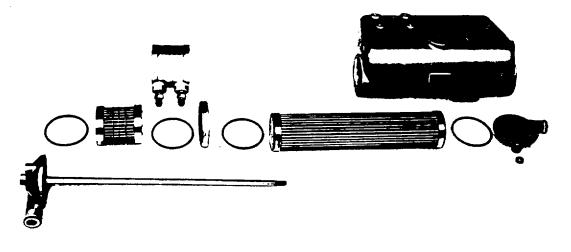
Exploded view of Heat Exchanger Assembly, (earlier engines)
